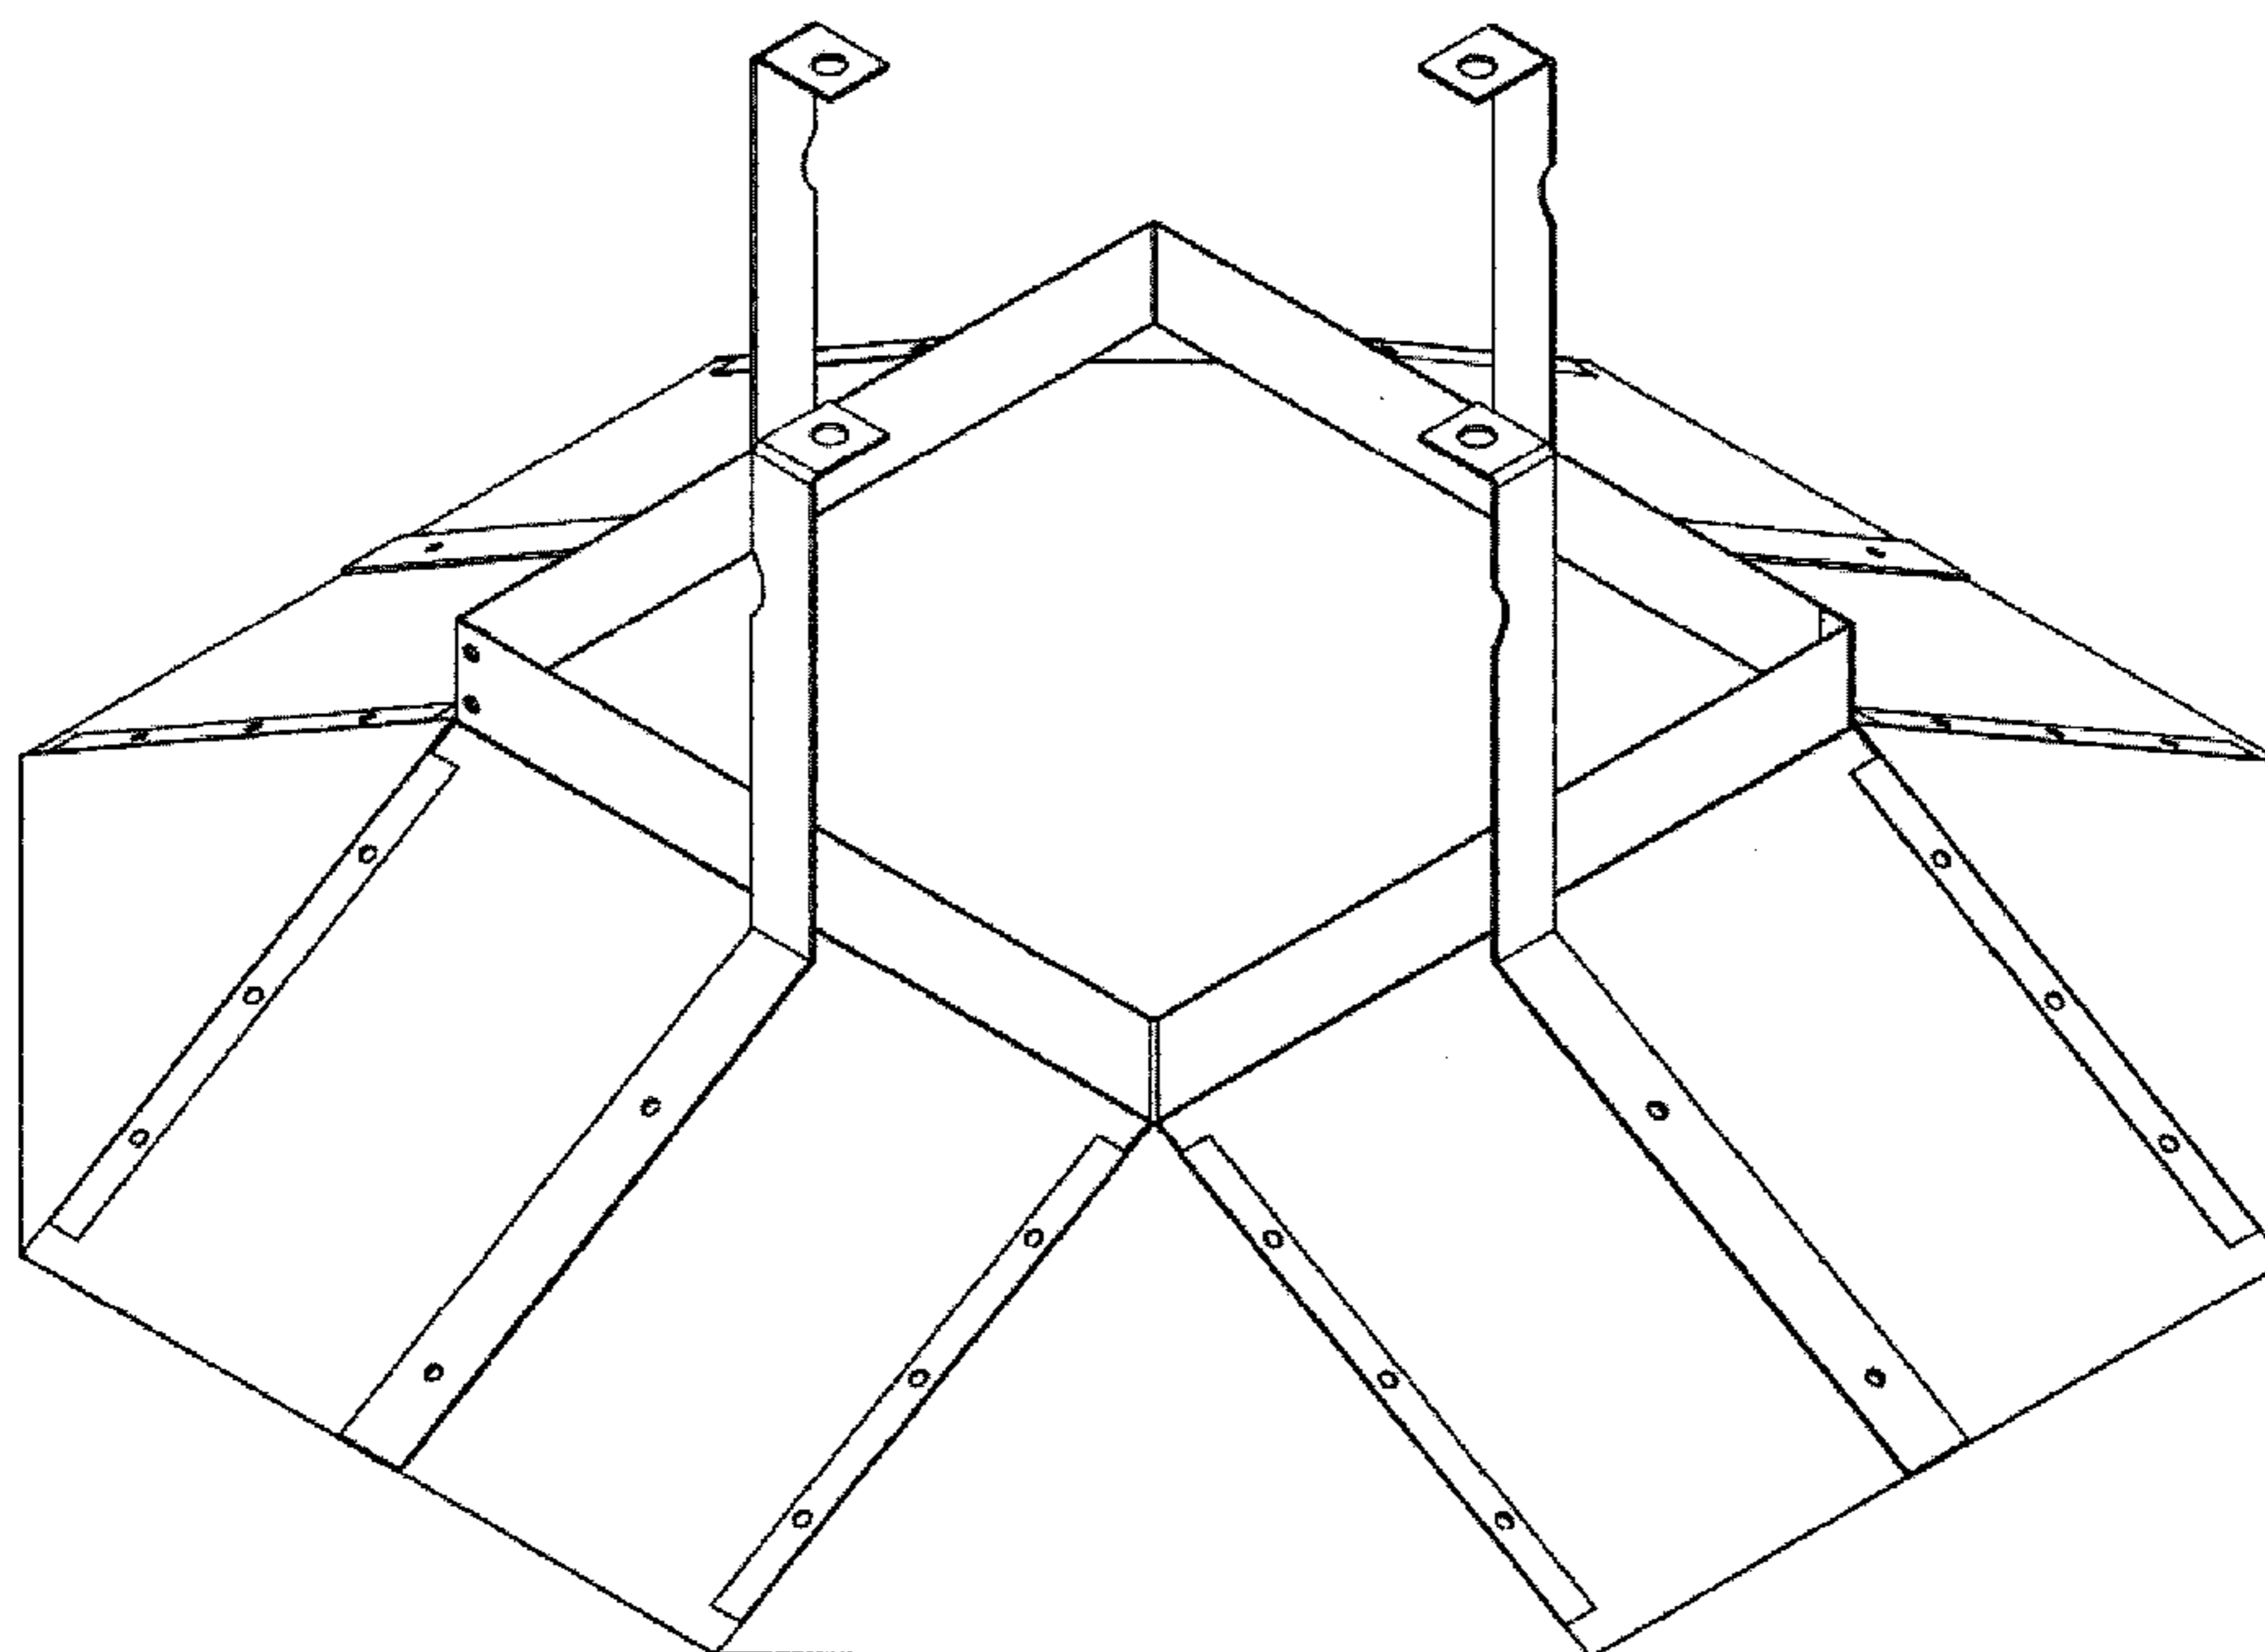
is a perspective view of a shroud for cooling tower fan motor showing our new design;
